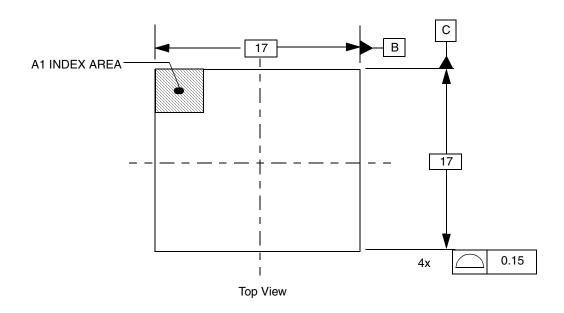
400 MAPBGA 17x17 mm Package Top view
